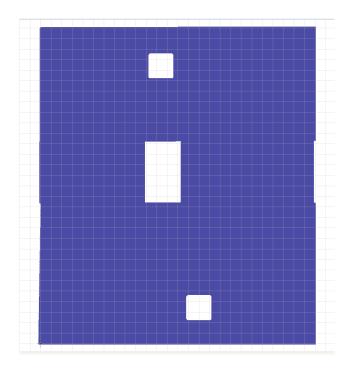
Bottom Layer of Adder Printed Circuit Board Layout
